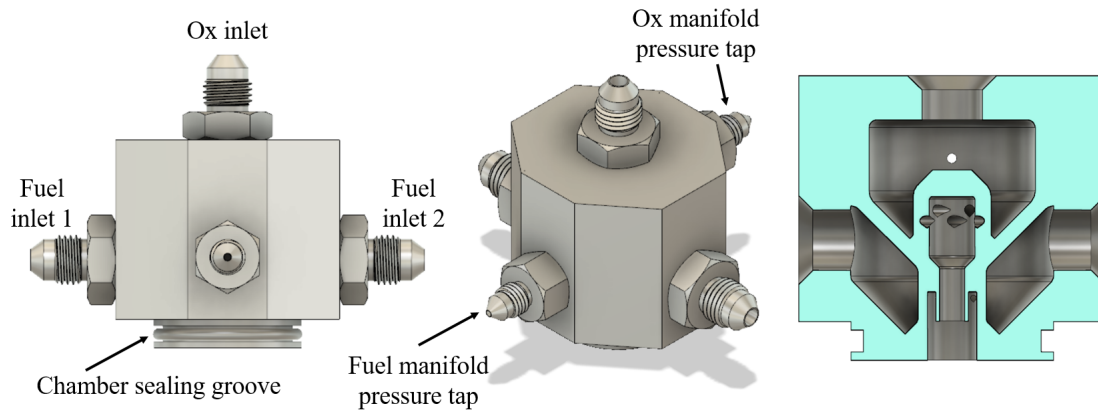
CAD model of baseline injector with front, isometric, and cross-sectional views.
